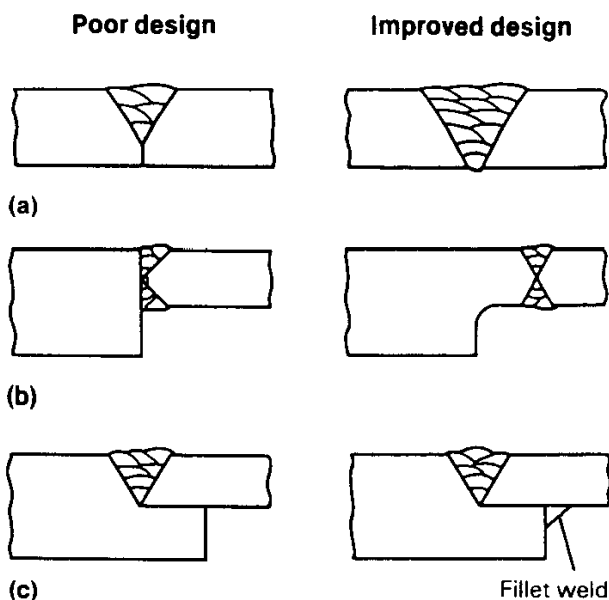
Modification of joints to produce optimum weld. (a) Partial joint penetration weld (left) changed to complete joint penetration weld (right). (b) Part modified to alleviate problems caused by changes in metal thickness. (c) Addition of secondary fillet weld to reduce stress concentrations of primary weld. Source: Ref 1
